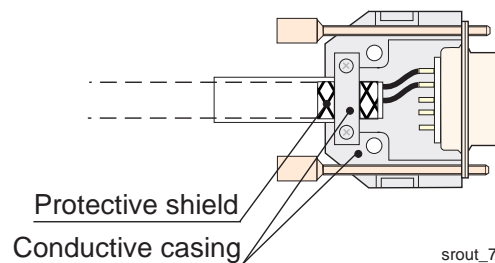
2 Protective shield connection of the twisted pair cable.
